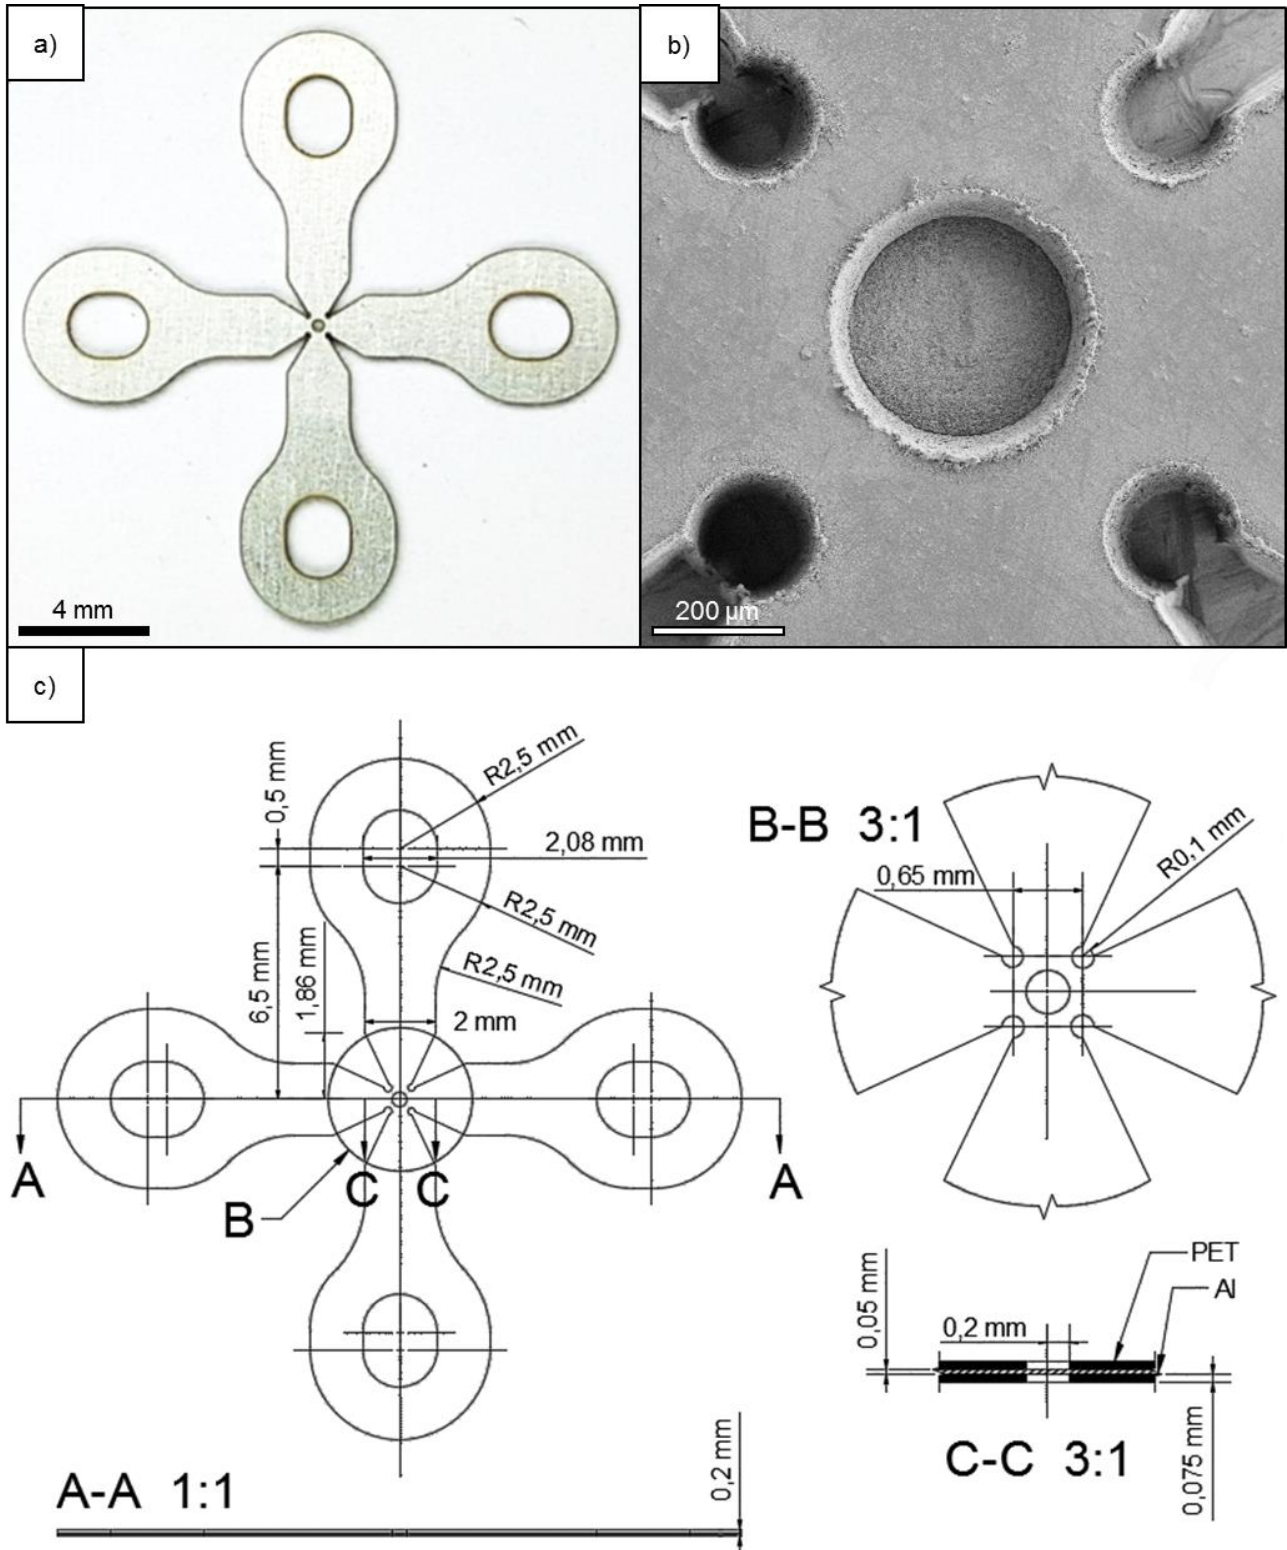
Cruciform design used in experiments. (a) Image of full cruciform; (b) SEM micrograph of cruciform test section, coated in carbon to prevent charging; (c) Cruciform dimensions.
